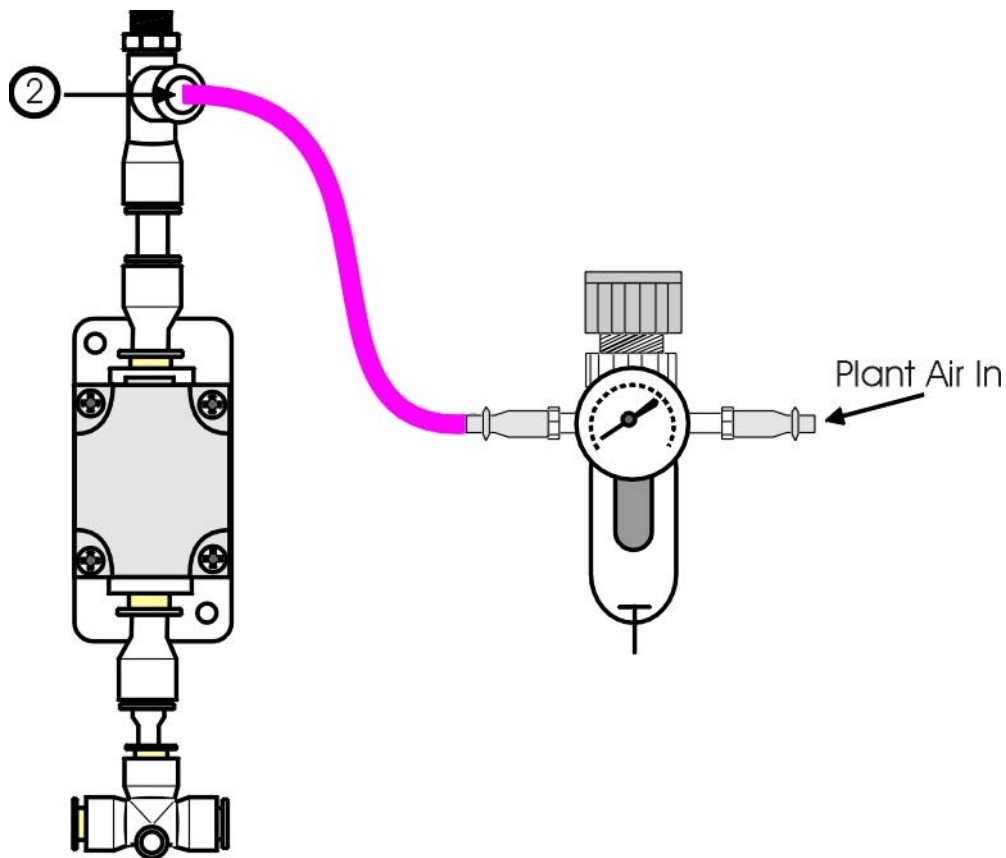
A-10 Plant air to Air Filter to tamp-jet module plumbing
